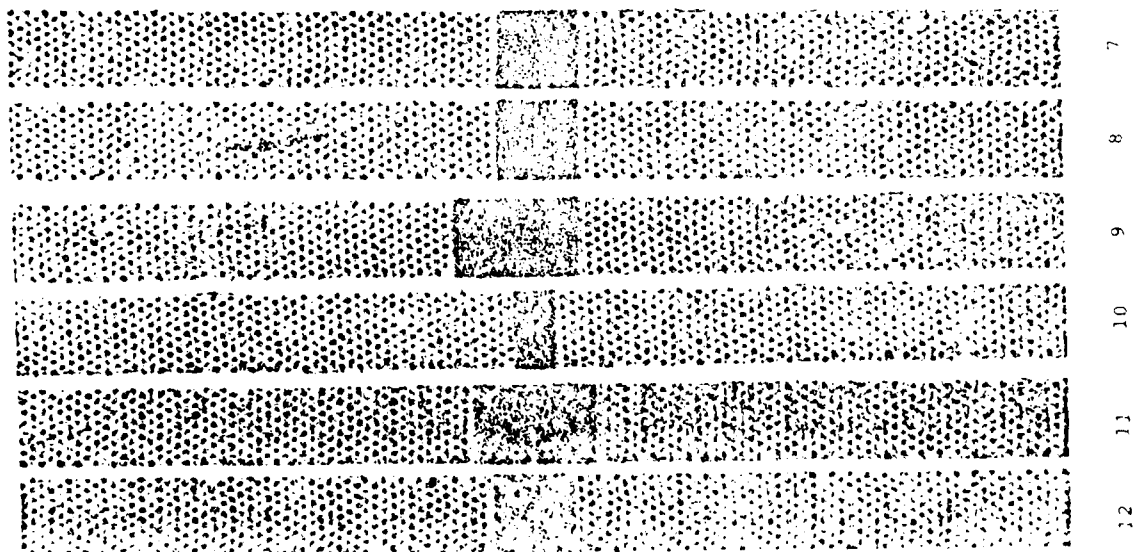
C SCAN OF SANDWICH BEAM SPECIMENS
